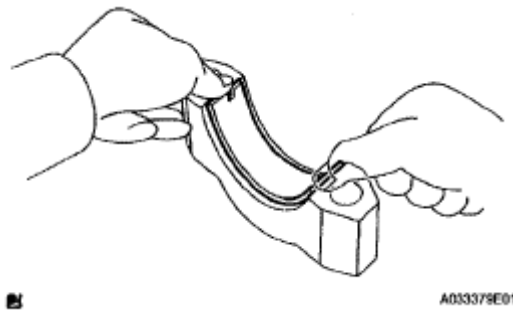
Installing Lower Bearing Onto Bearing Cap
